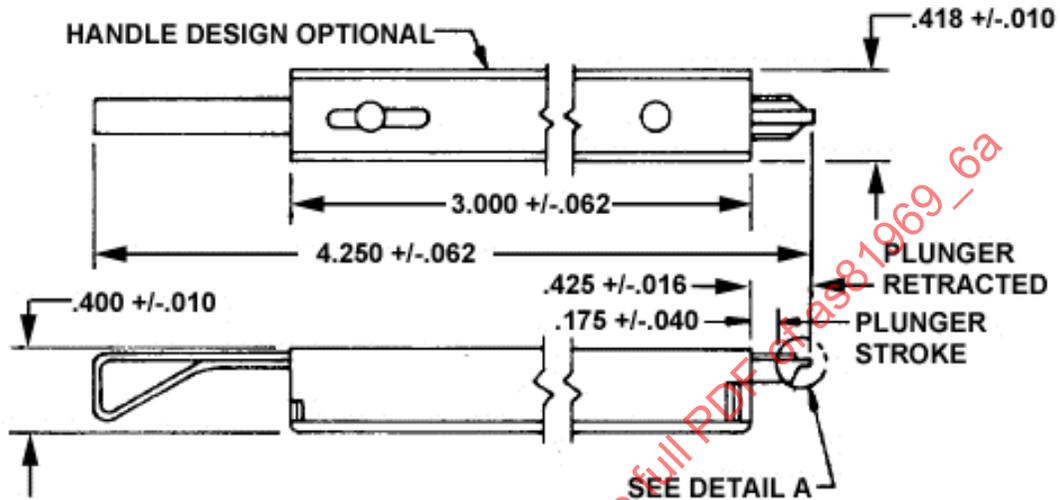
TOOL CONFIGURATION AND DIMENSIONS
